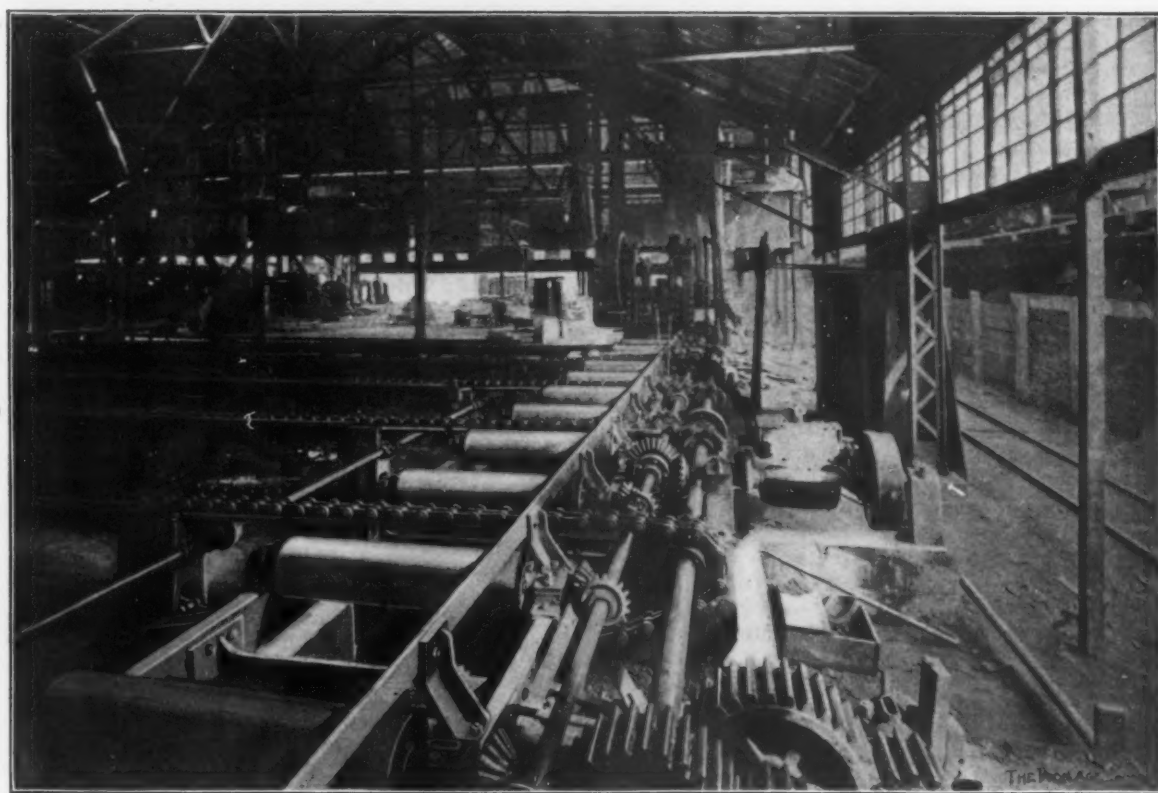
Plate Transfer Table, 42-Inch Steam Shears and Transfer Link Conveyors.
